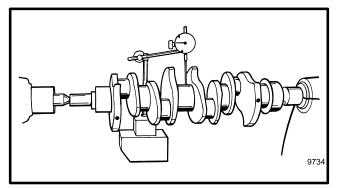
CRANKSHAFT INSPECTION
